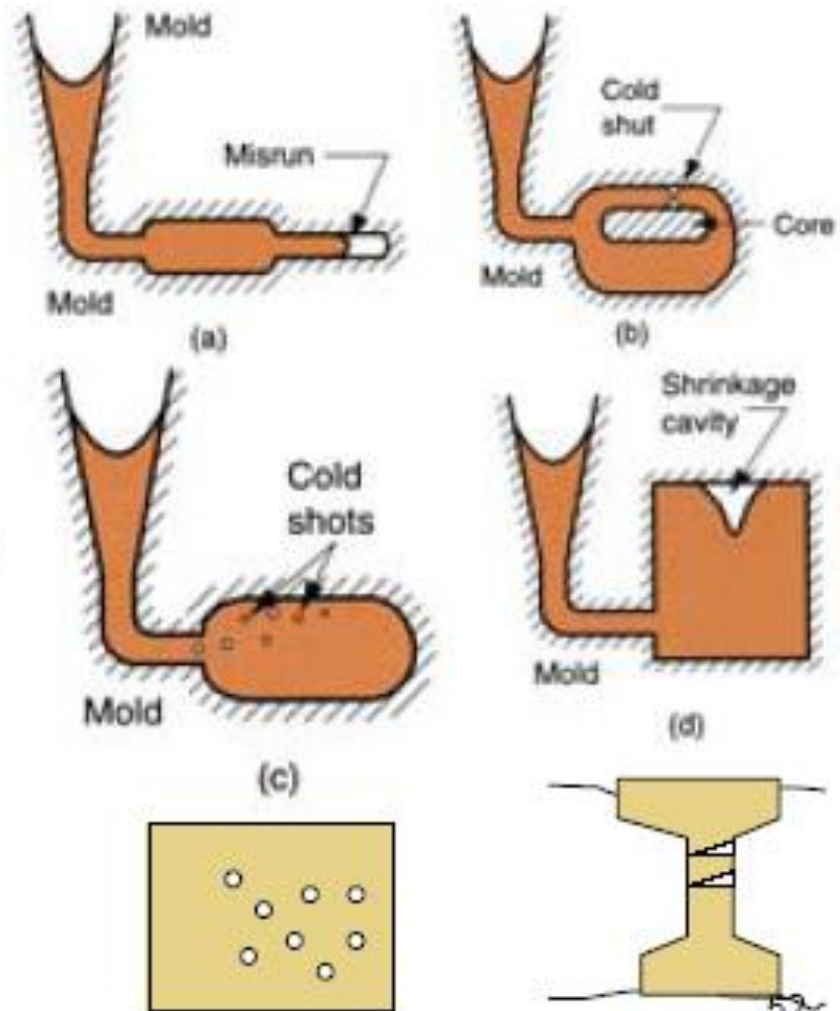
Some common defects in castings: (d) shrinkage cavity
